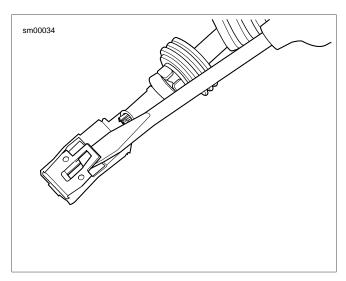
Delphi Maxi-Fuse Housing: Bend Tang
